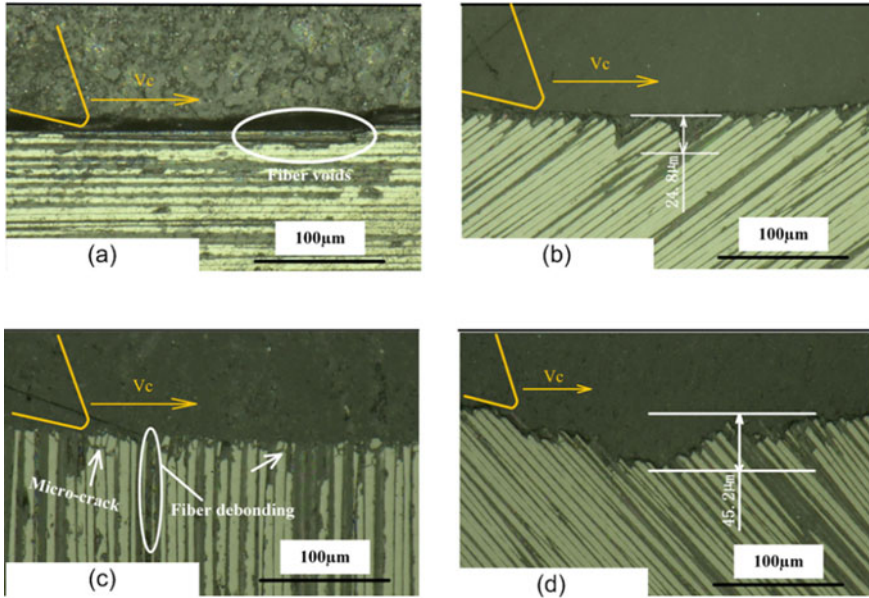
Subsurface damage in fibre layer near the CFRP outlet (helical milling): a subsurface damage at 0° cutting angle; b subsurface damage at 45° cutting angle; c subsurface damage at 90° cutting angle; d subsurface damage at 135° cutting angle [26]
